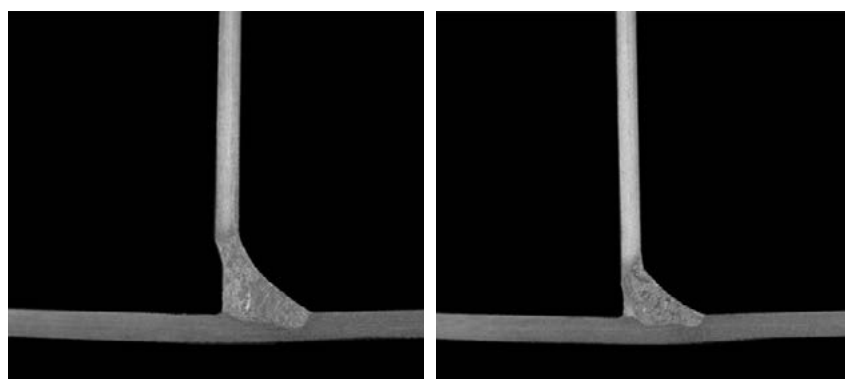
Examples of fillet weld root concavity with the vertical element undercut
